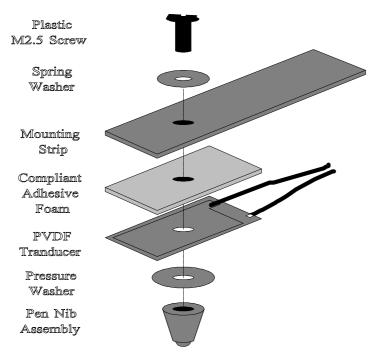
Exploded view of manipulator's thermal sensor
